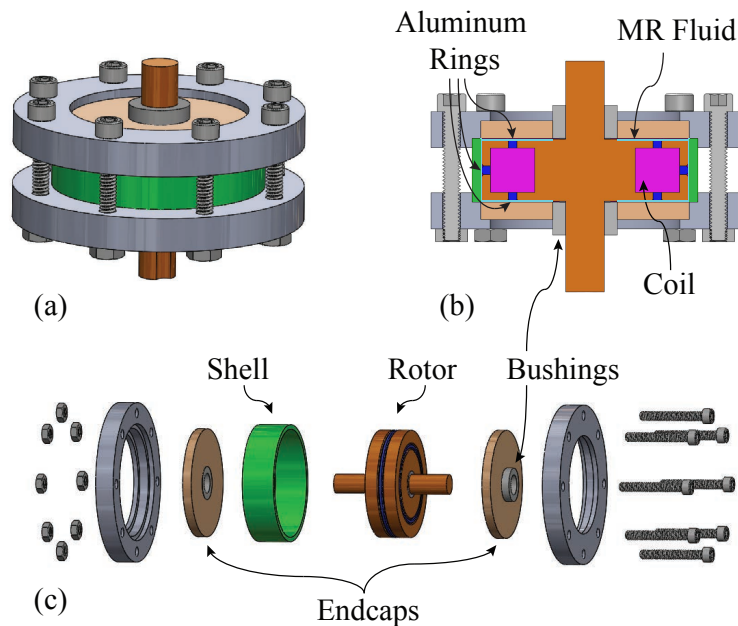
CAD drawings of three different views of the MR brake assembly: (a) Assembled view, (b) cross-section view, and (c) exploded view. In (b), the current-carrying coils are colored purple within the low-carbon steel rotor, colored orange. Aluminum rings, colored blue, are embedded into the rotor. The outer housing consists of a low-carbon steel ring shell, colored green, and two low-carbon steel endcaps, colored pale orange. MR fluid, colored cyan, resides in the thin gap between the rotor and the housing, and the entire housing is held together by two aluminum end pieces, which are secured with eight bolts that surround the assembly.
